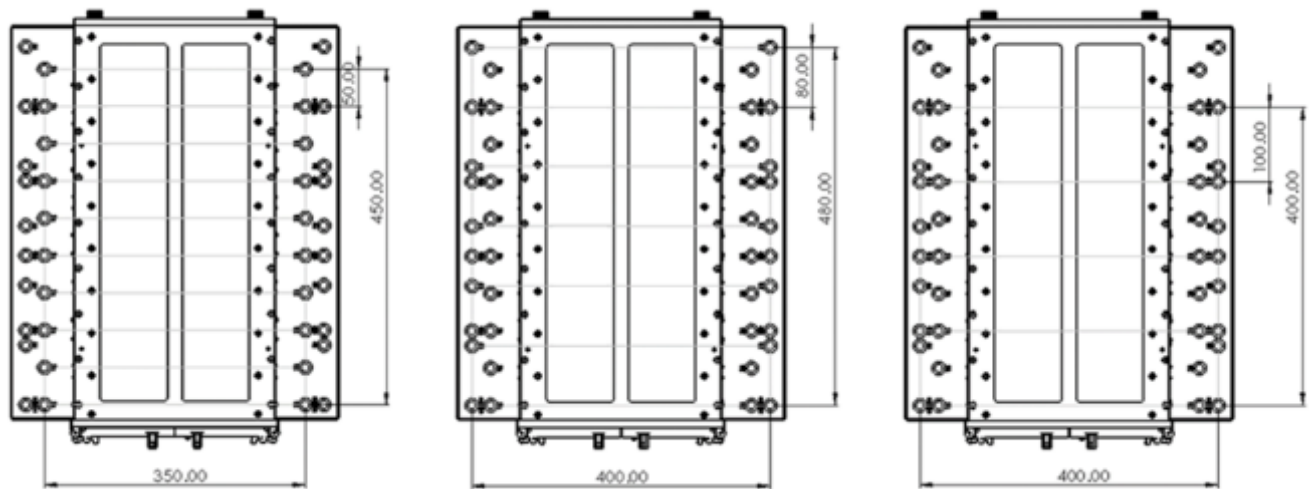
Mounting interfaces of the 8U and 16U TestPod
